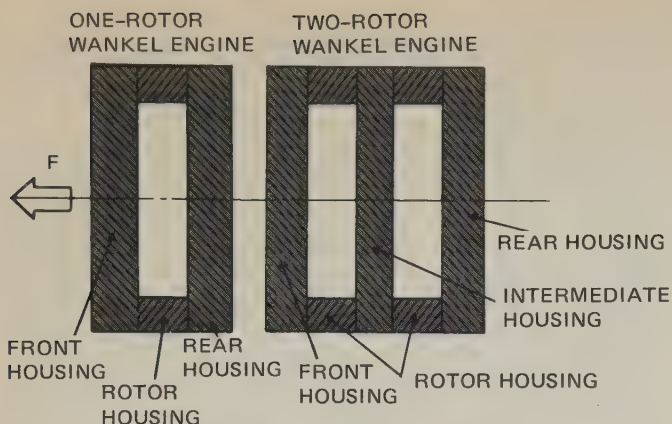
How the side and rotor housing stack up in a one-rotor and a two-rotor Wankel engine. (Toyo Kogyo Company, Ltd.)
